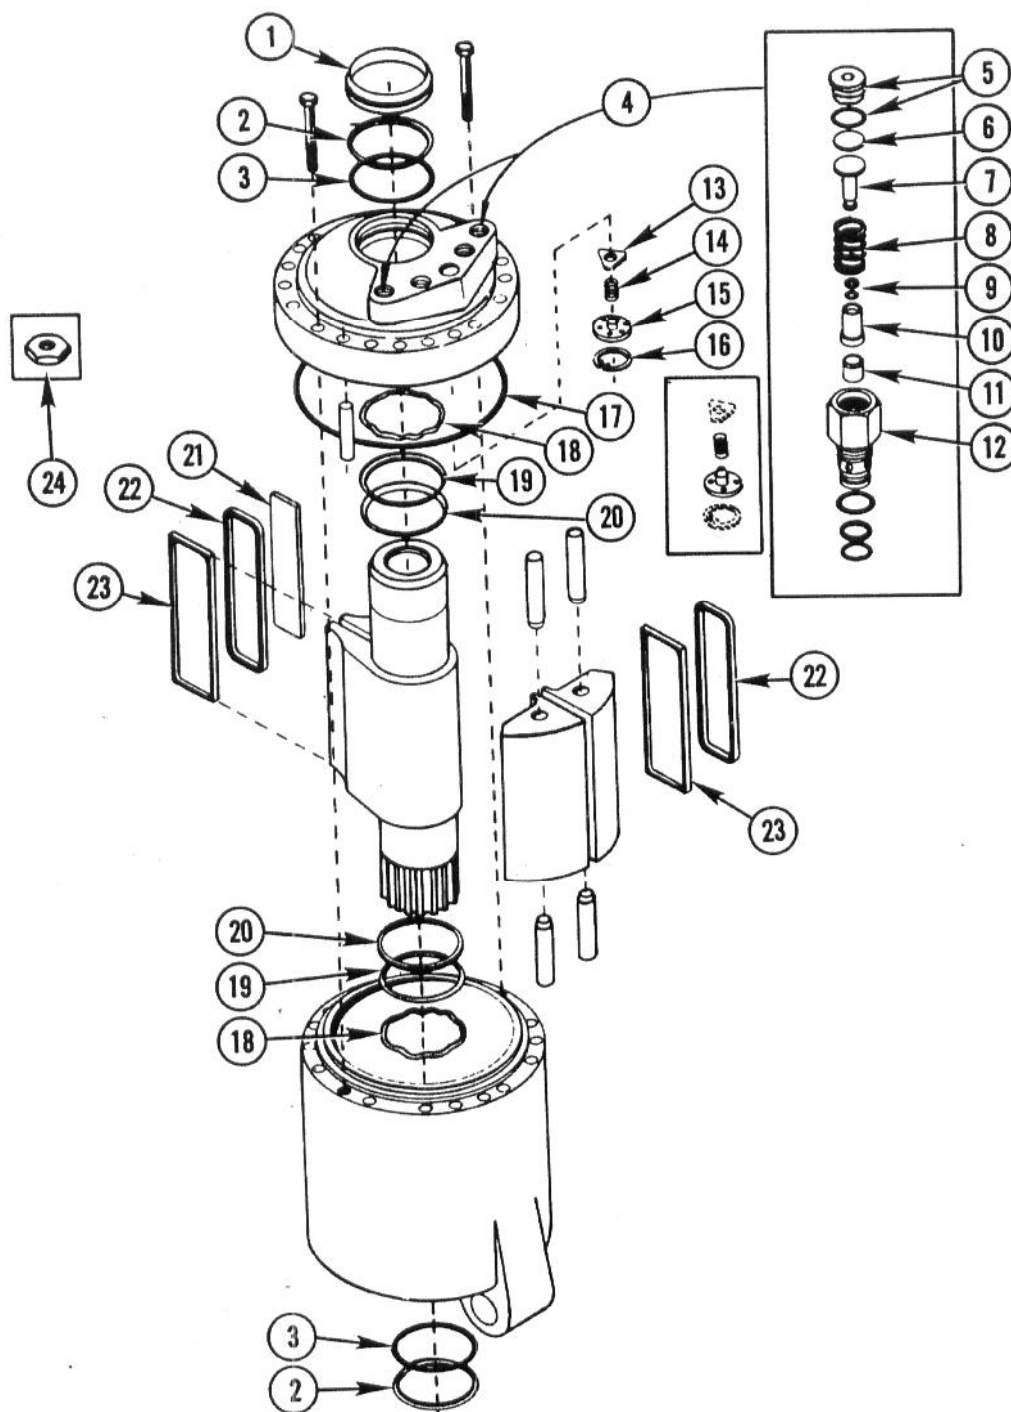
Parts Identification of Rotary Cylinder MF Part No. 708 714 M92
